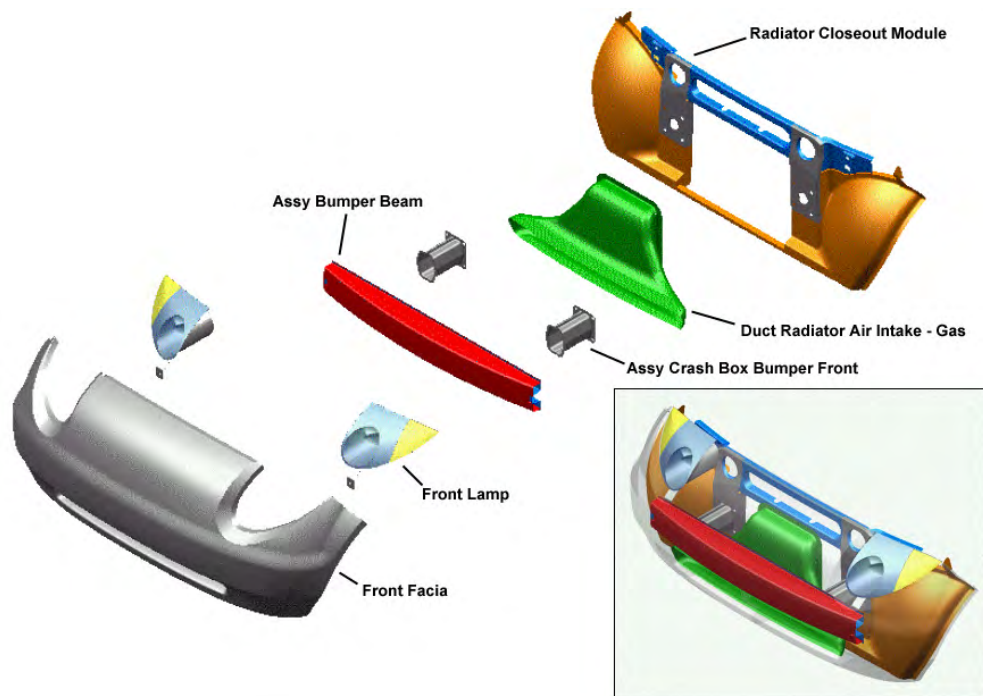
Front fascia module exploded view (gasoline)
